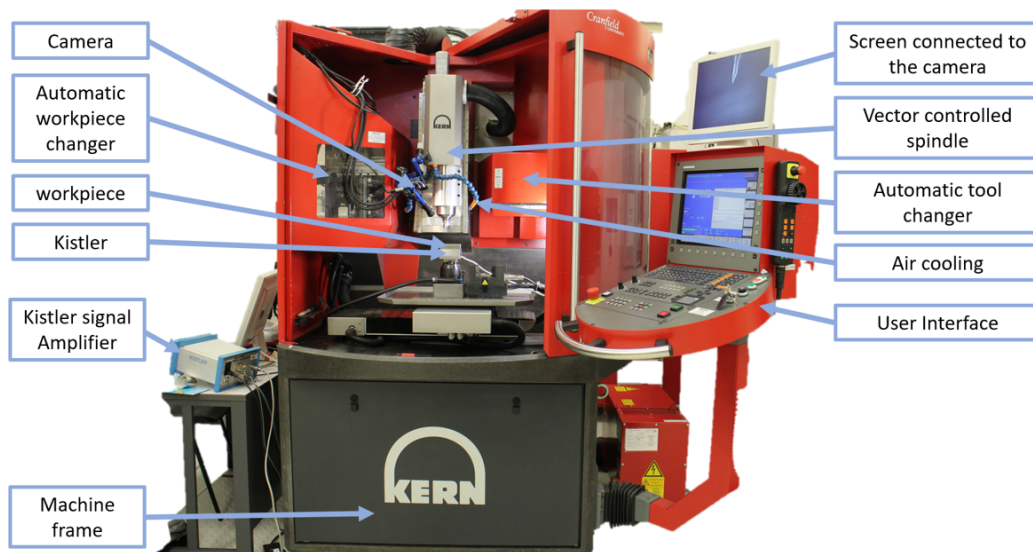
The Kern EVO micromilling machine in Cranfield University, B70
